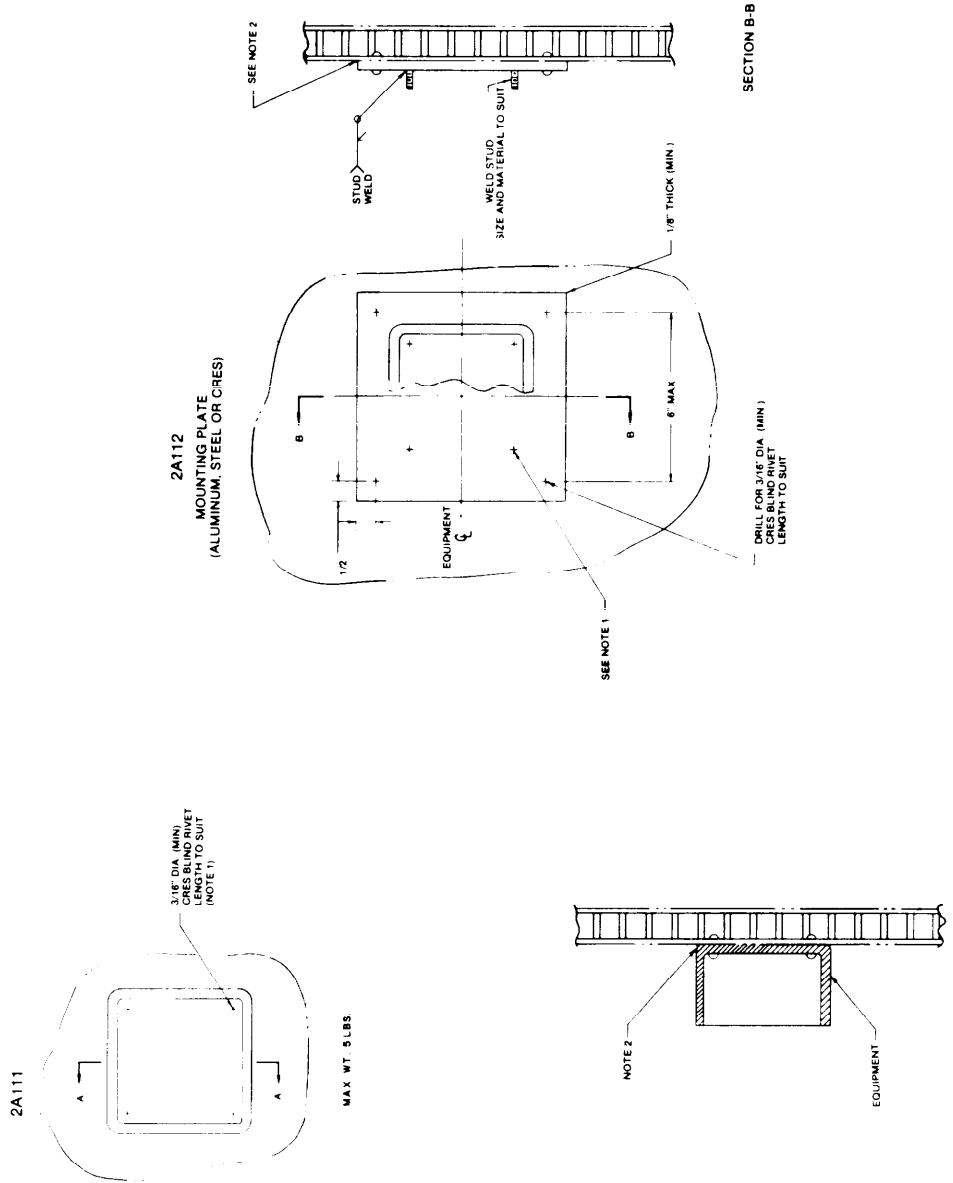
A111. Equipment mounted on metal joinder bulkheads.
